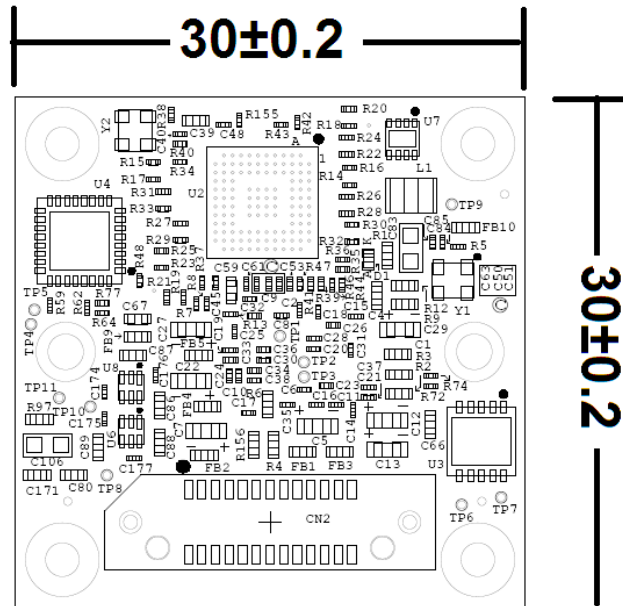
Bottom View of e-CAM217_CUMI0234_MOD Mechanical Drawing (Mirrored)
